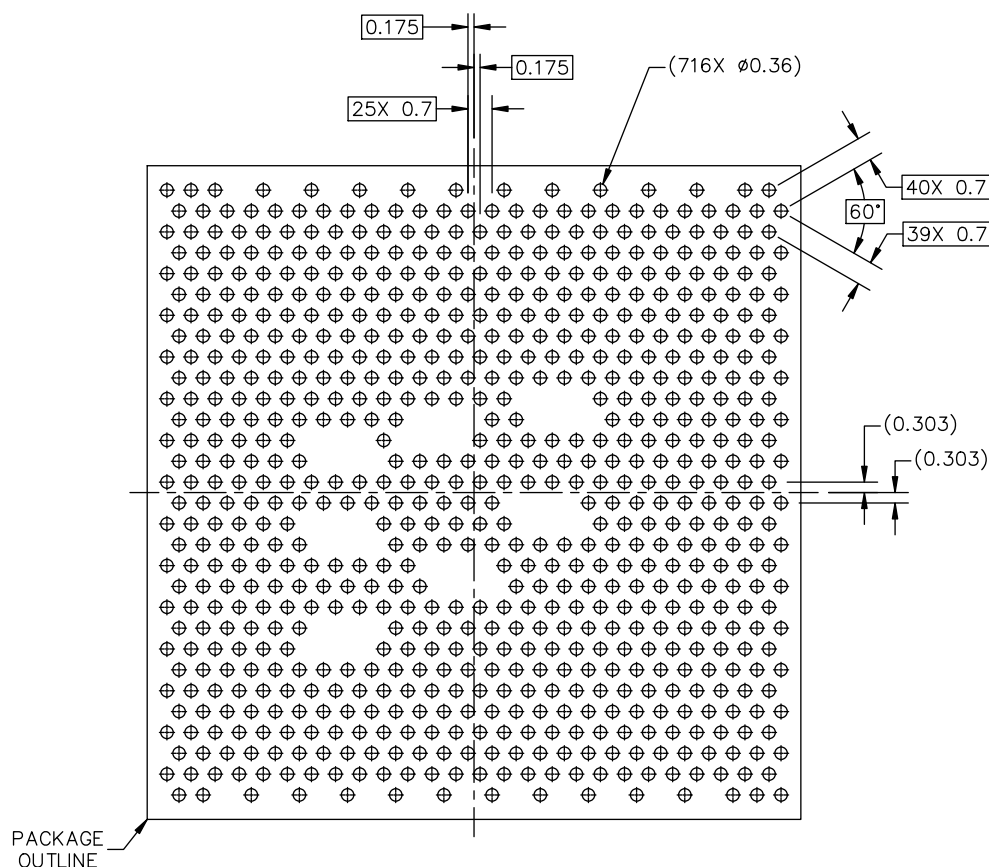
Reflow soldering footprint part2 for FC-PBGA716 (SOT2204-1)
